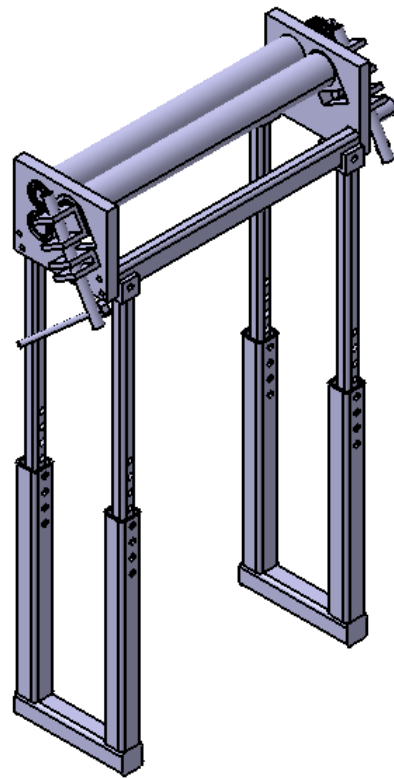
Surface bending tool with adjustable stand as Concept1
